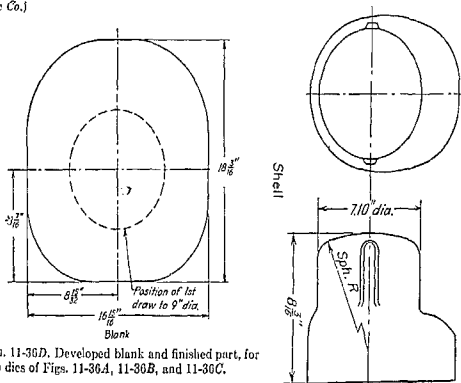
D. Developed blank and finished part, for the dies of Figs. 11-36A, 11-36B, and 11-36C.
